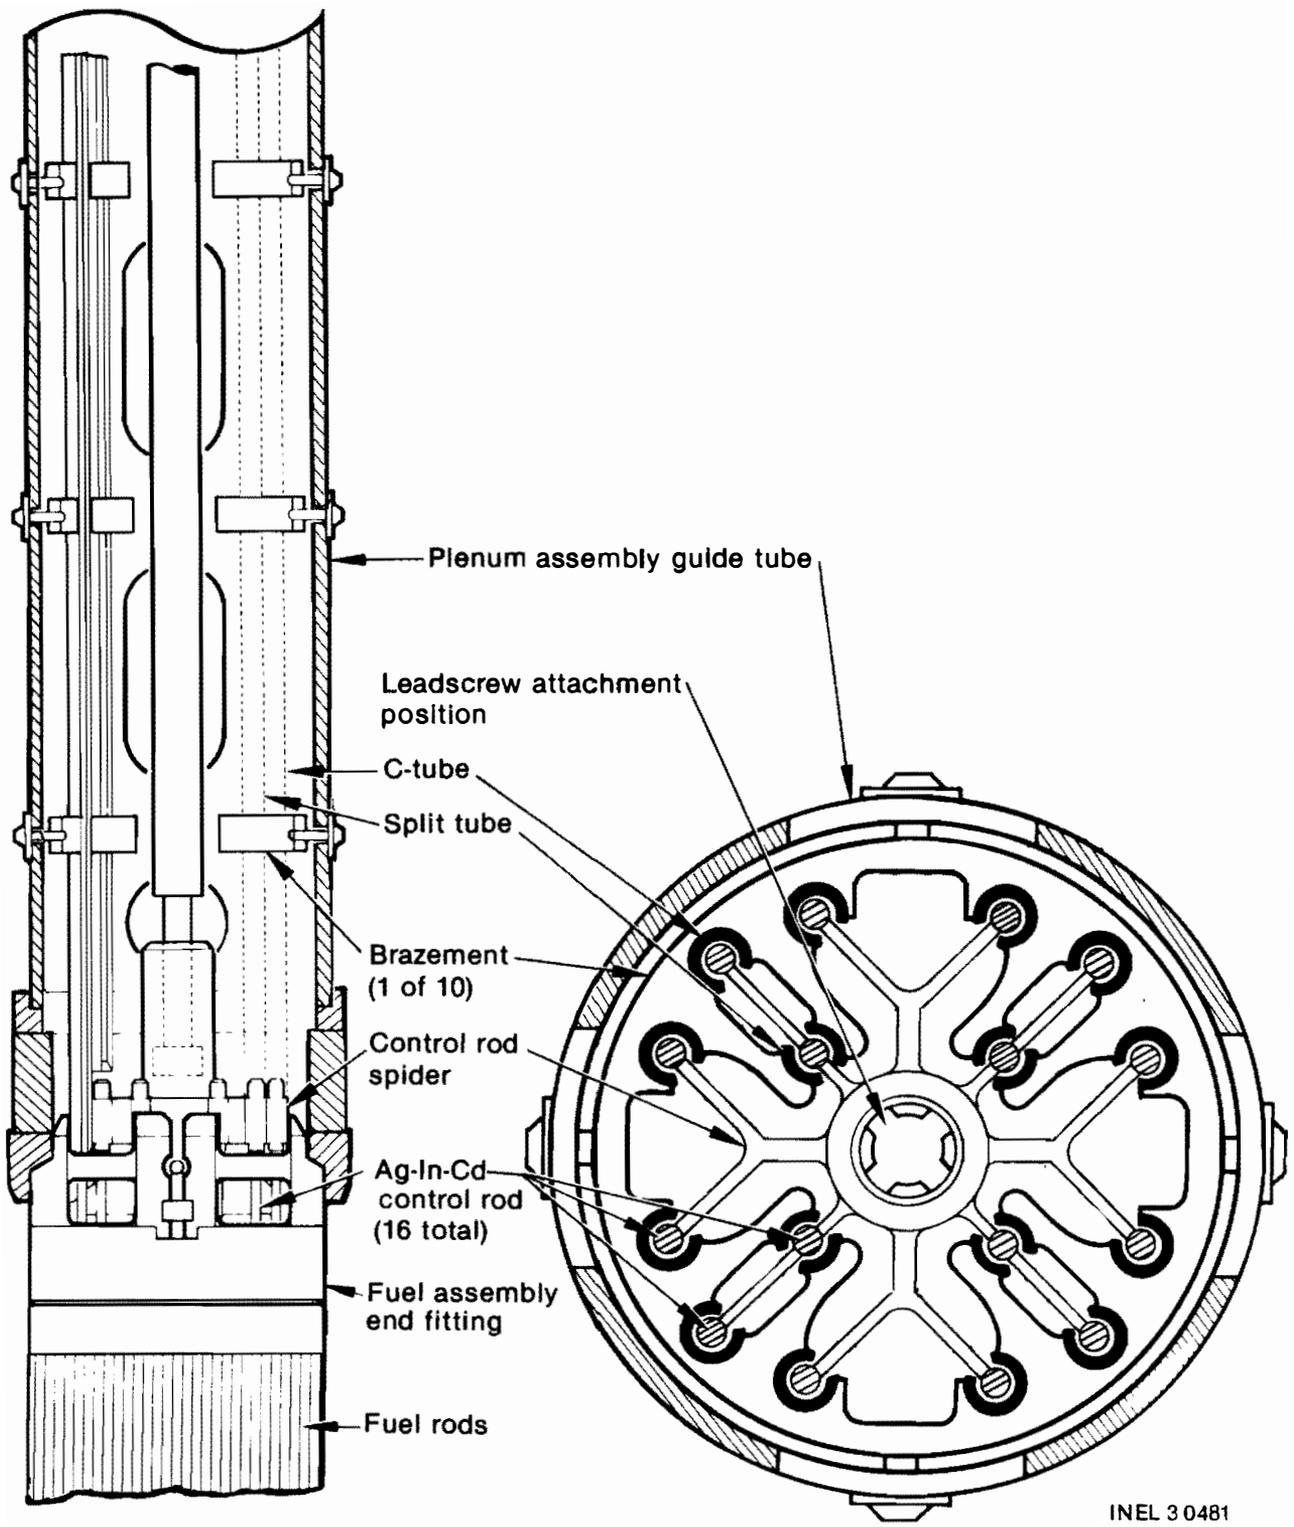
Vertical and horizontal cross section of plenum guide tube assembly.
